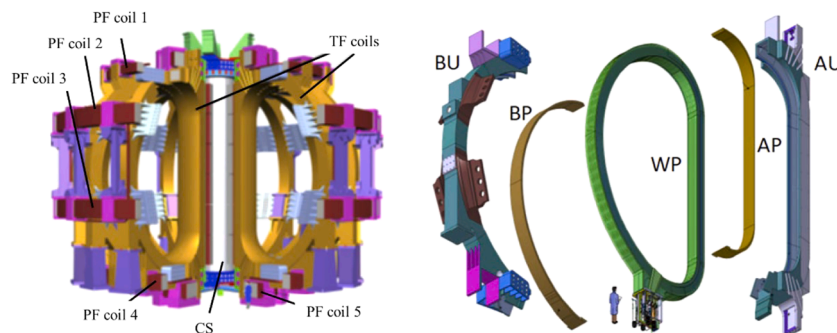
(a) Magnet System. (b) Exploded view of one toroidal field coil [5].
